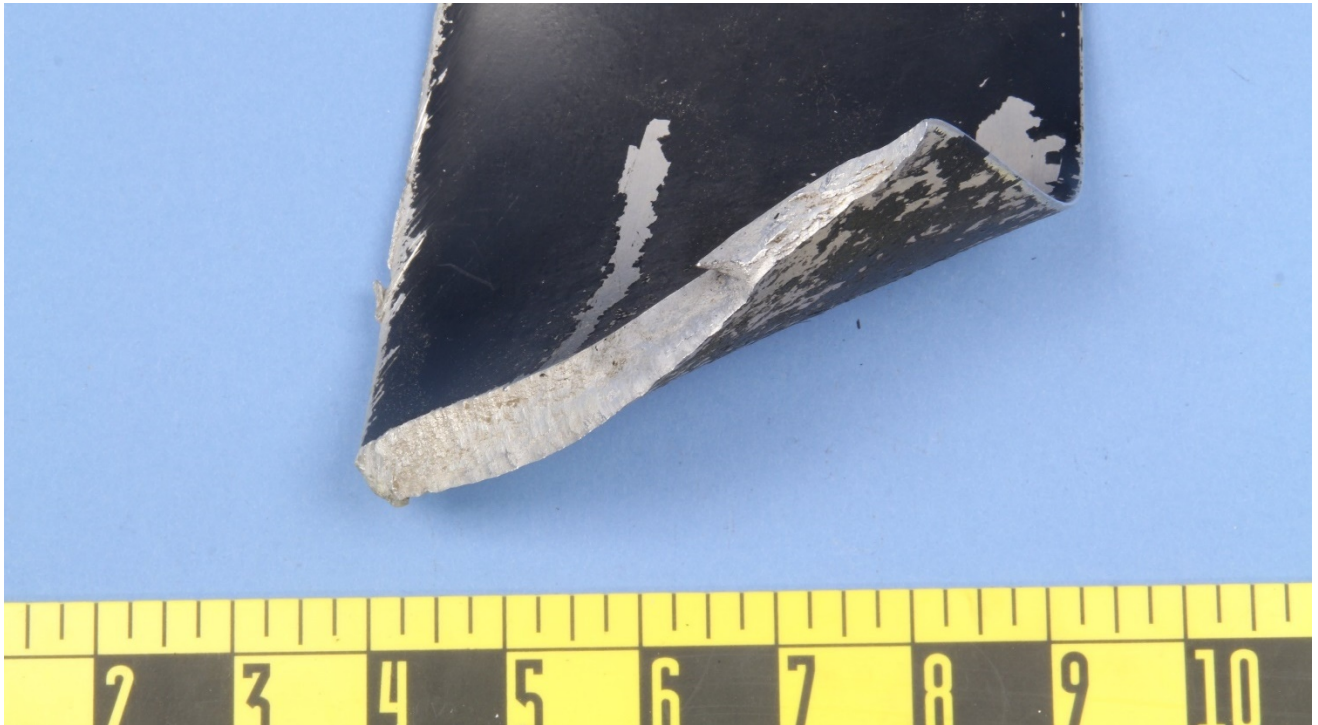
View of the fracture surface from the blade remnant.
